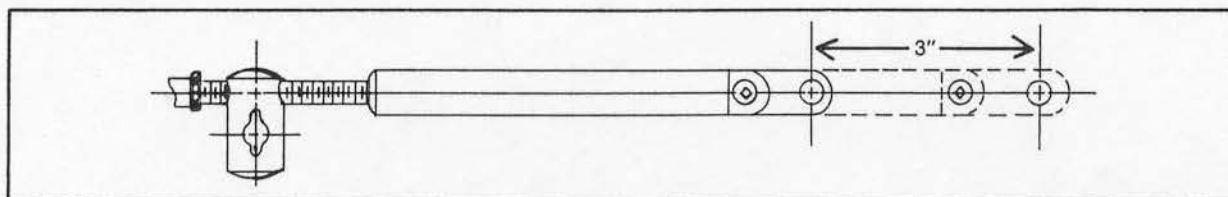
MINIMUM Shift Control Cable Travel (3 inches)
